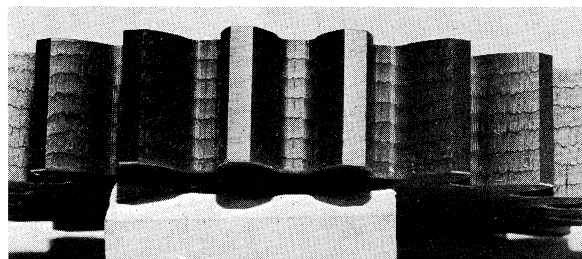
Hobbed finish of left-hand gear in Fig. 5-6 as produced by a 4-in. dia., 10-flute, single-thread hob rotating at 71-rpm and fed at 0.150-in. per revolution.
